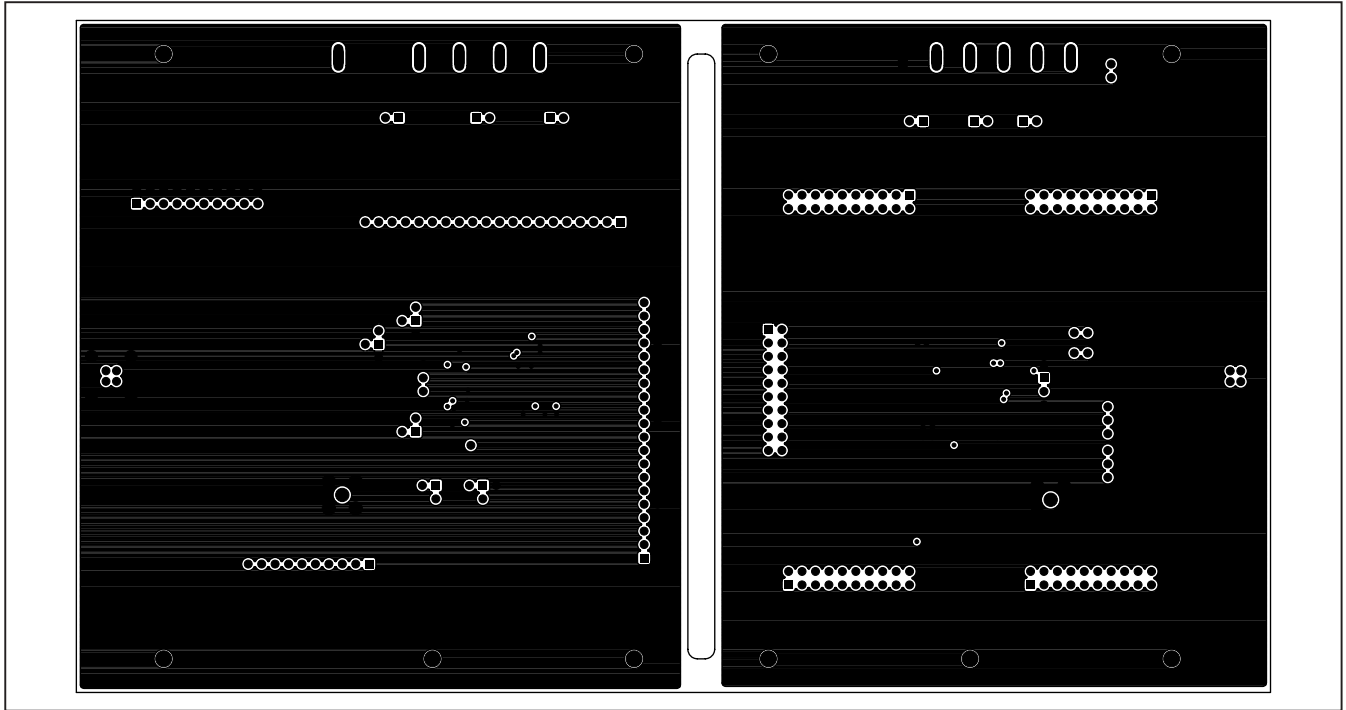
MAX9217/MAX9218 EV Kit PCB Layout—Inner Layer 2
